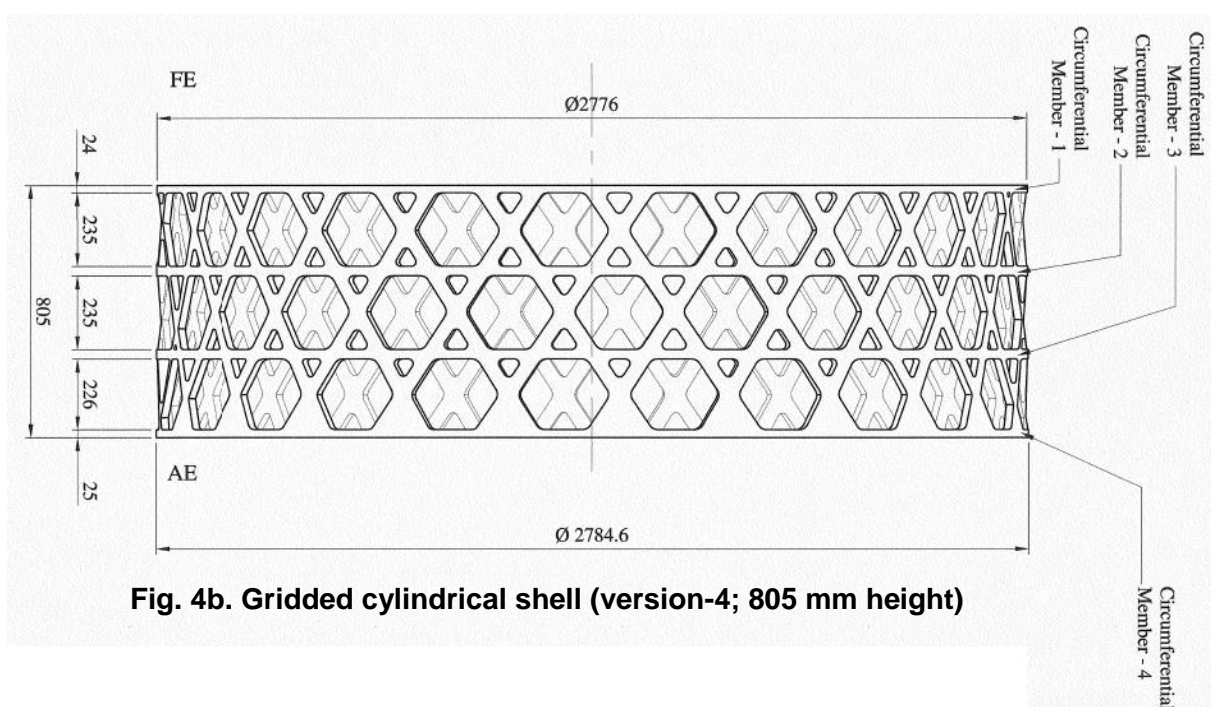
Gridded cylindrical shell (version-4; 805 mm height)
